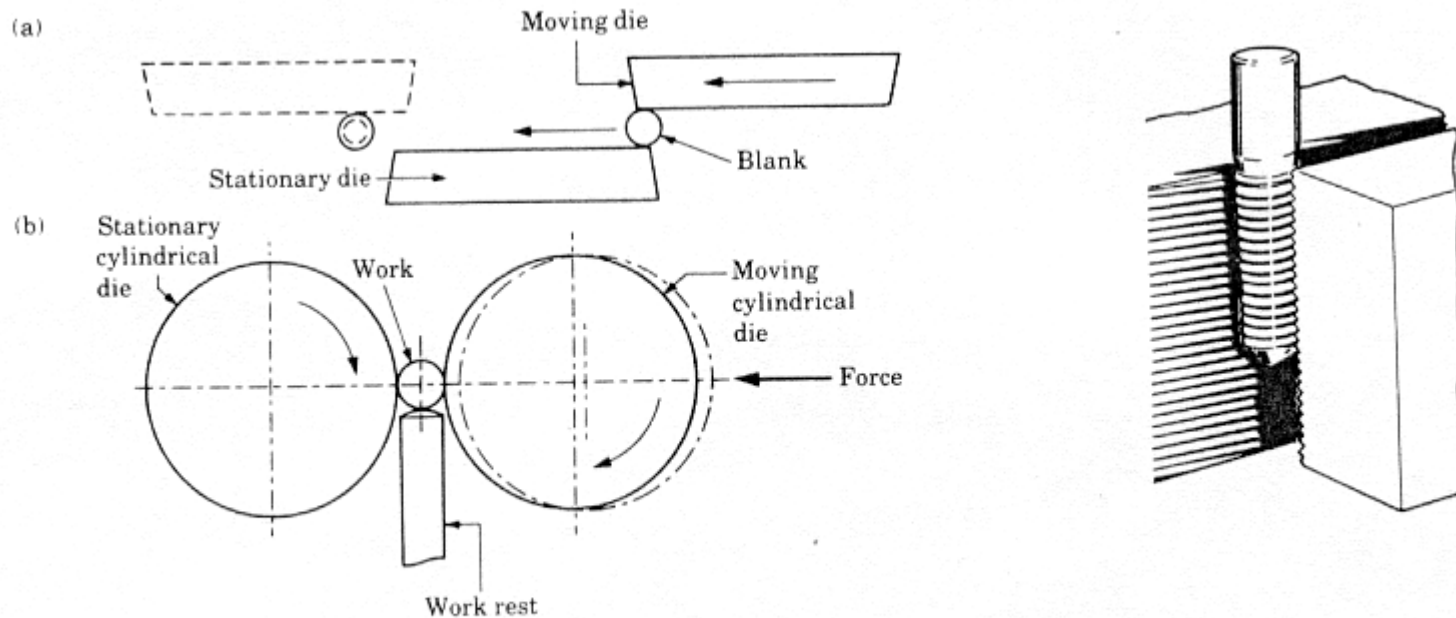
Thread rolling processes. (a) Flat dies. (b) Two-roller dies. These processes are used extensively in making threaded fasteners at high rates of production.
